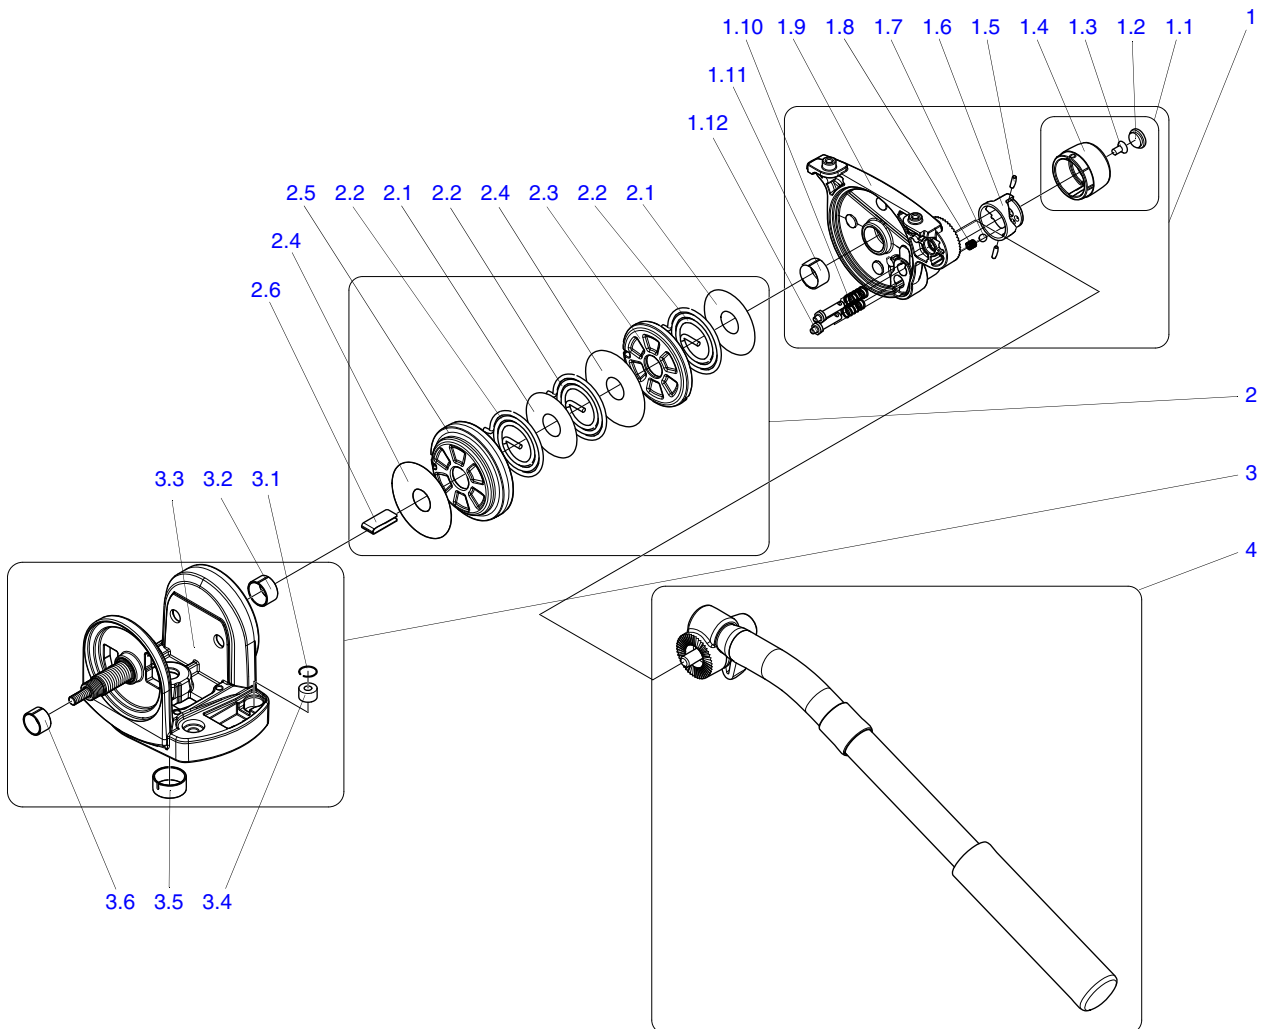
Pro-6^{HDV} Pan and Tilt Head - RH Side Plate and Balance Assembly
